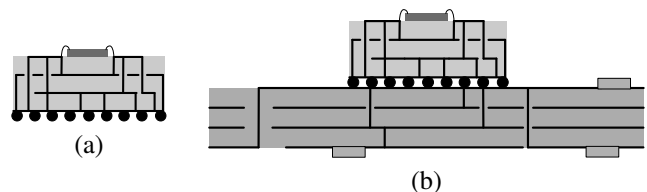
Package in stand-alone conditions (a) and with PCB (b).
